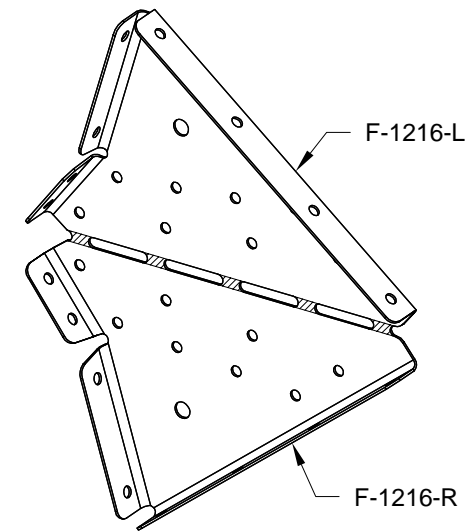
SEPARATE F-1216 SEAT BELT ATTACH LUG SUPPORT
